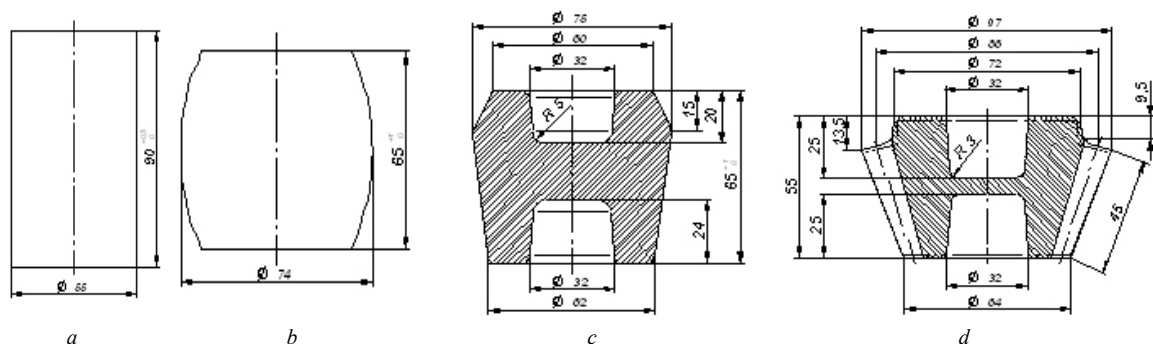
Stages of forging of conical toothed wheel: a) billet, b) billet upsetting, c)-preform d) forging
